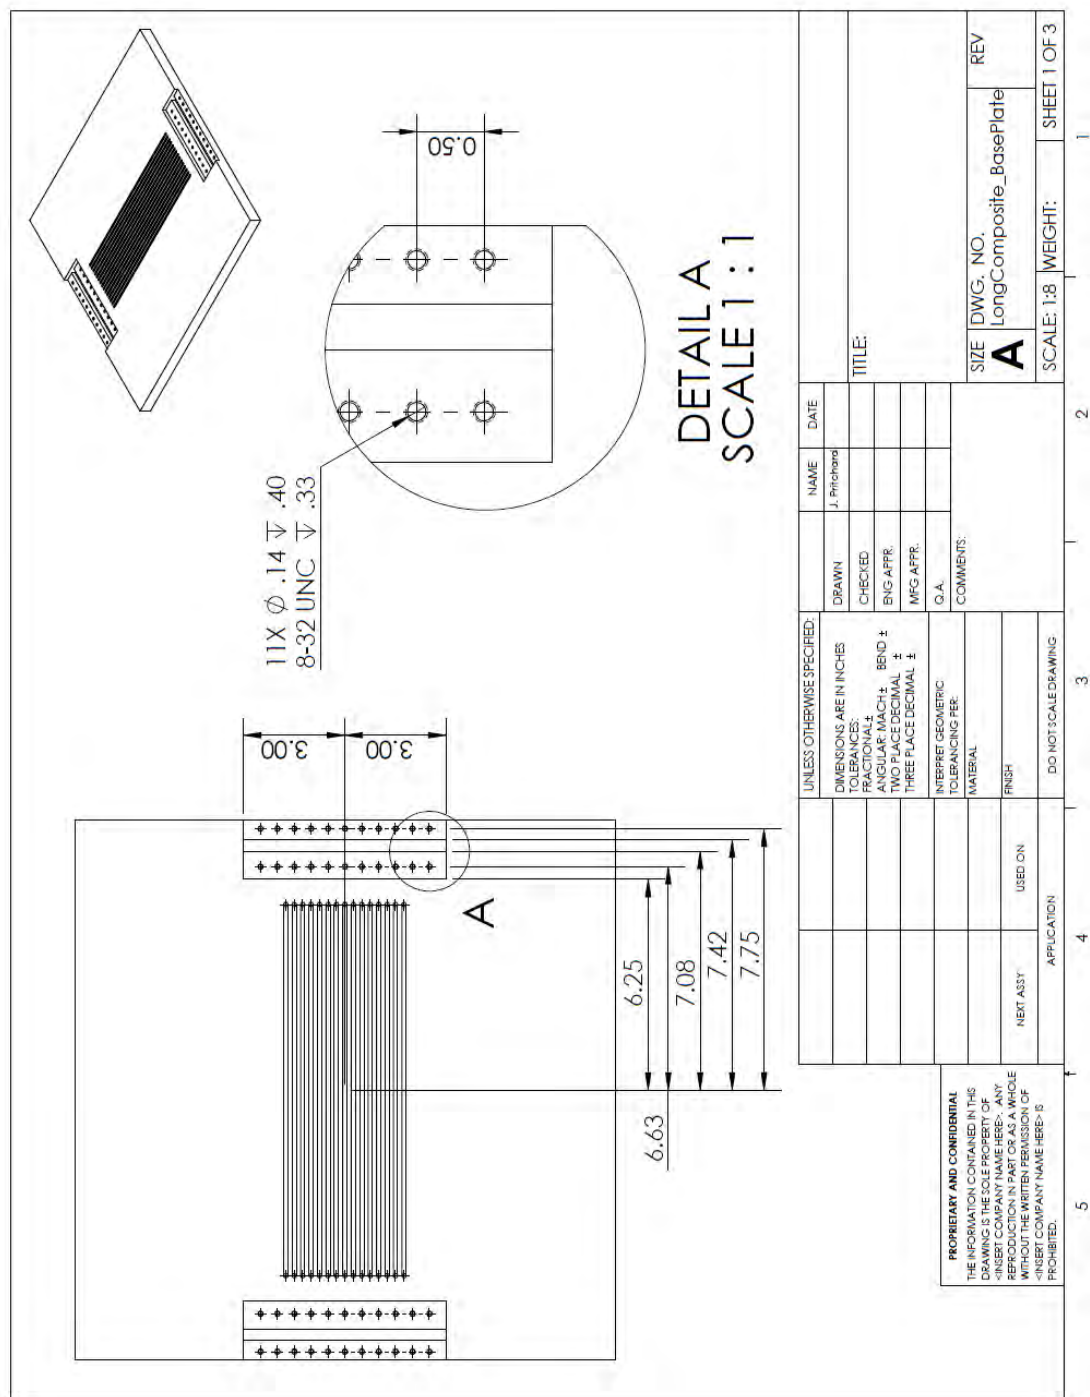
Dimensional drawing of base plate for producing large geometry samples. Sheet 1 of 2.
